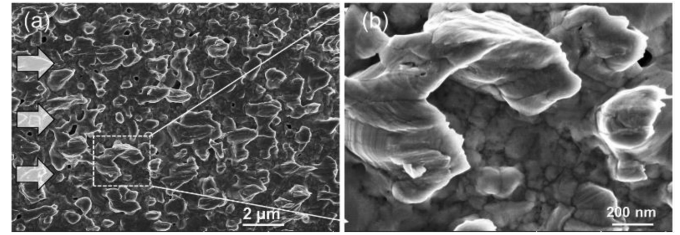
(a) Fracture surface of the DBC substrate after the die shear test. (b) Magnified view of the fracture surface.
